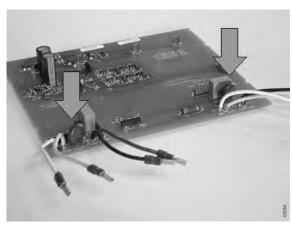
MOV location on Interface PCB (75 kW ~ 110 kW models)
